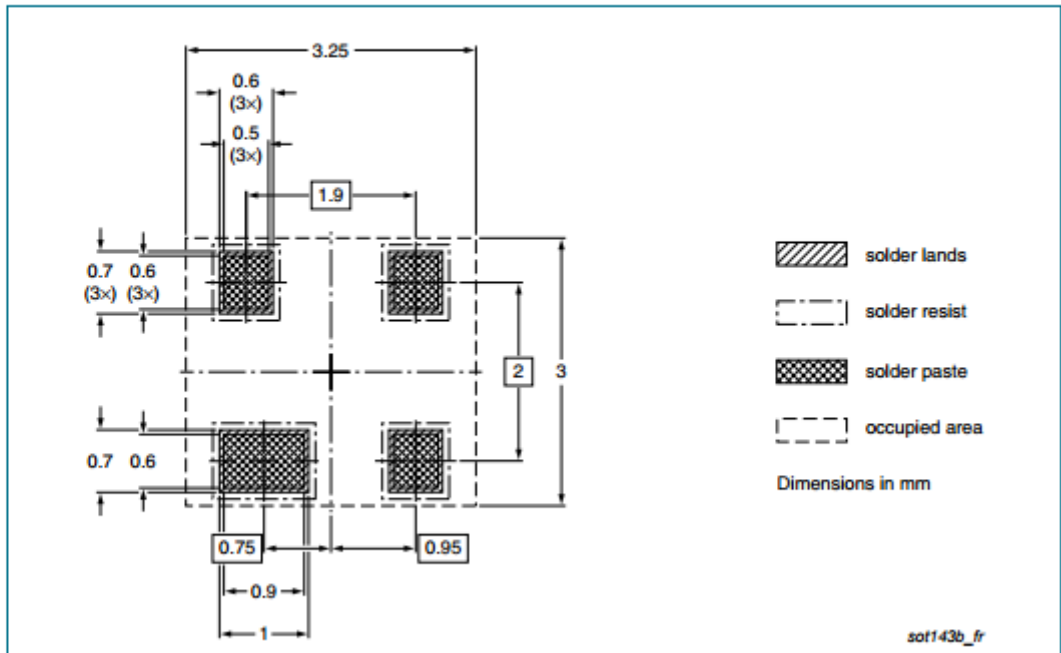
Reflow soldering footprint BAS28 (SOT143B)
